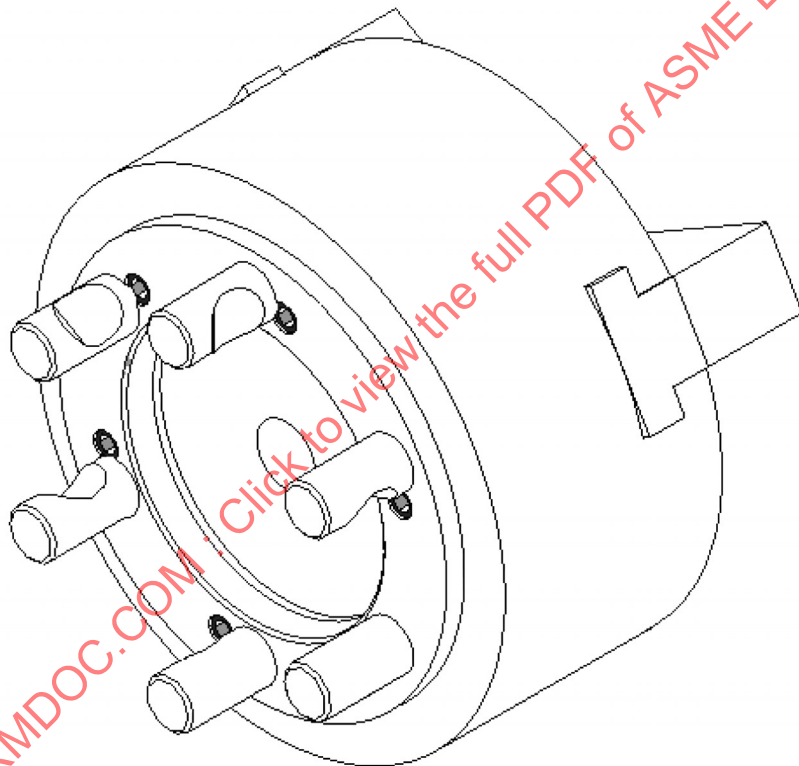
Types D-3 and D-4 Backs of Chucks and Faceplates
